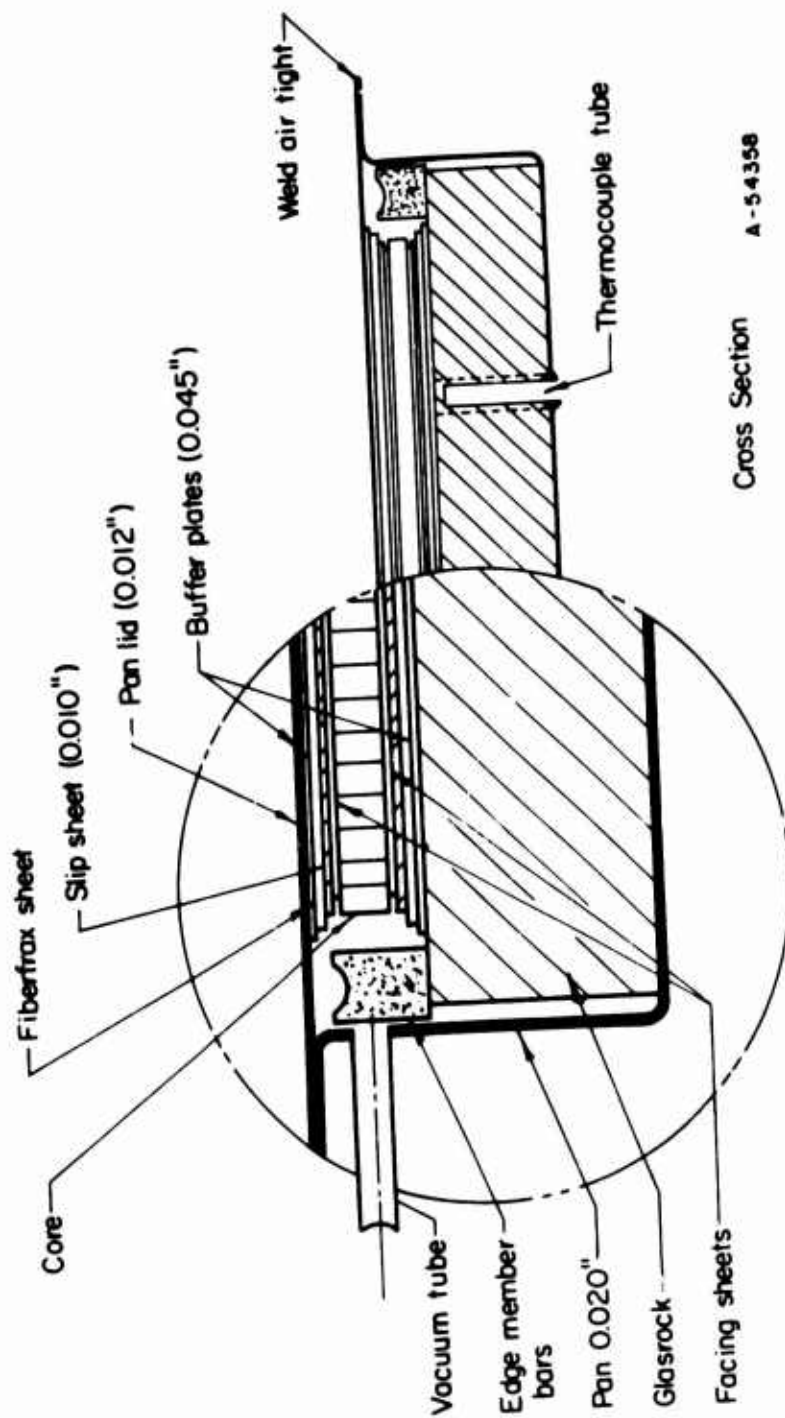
TYPICAL CERAMIC ADHESIV BONDING VACUUM PRESSURE FIXTURE (Ref. 108)
